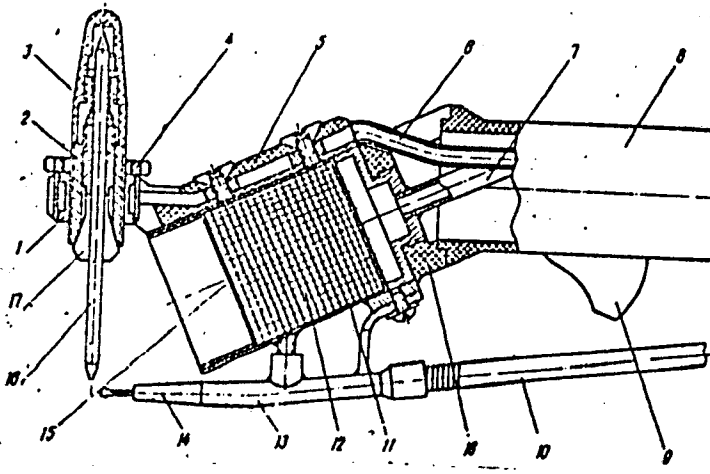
Gun for argon shielded arc welding of titanium
